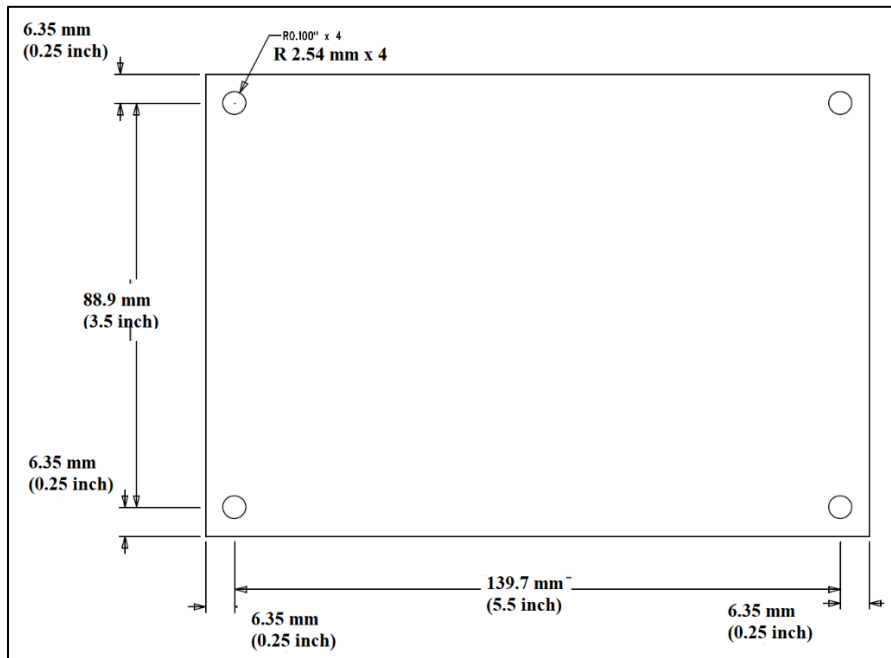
(v) Design for hole to mount the microcontroller PCB on side # 4.
